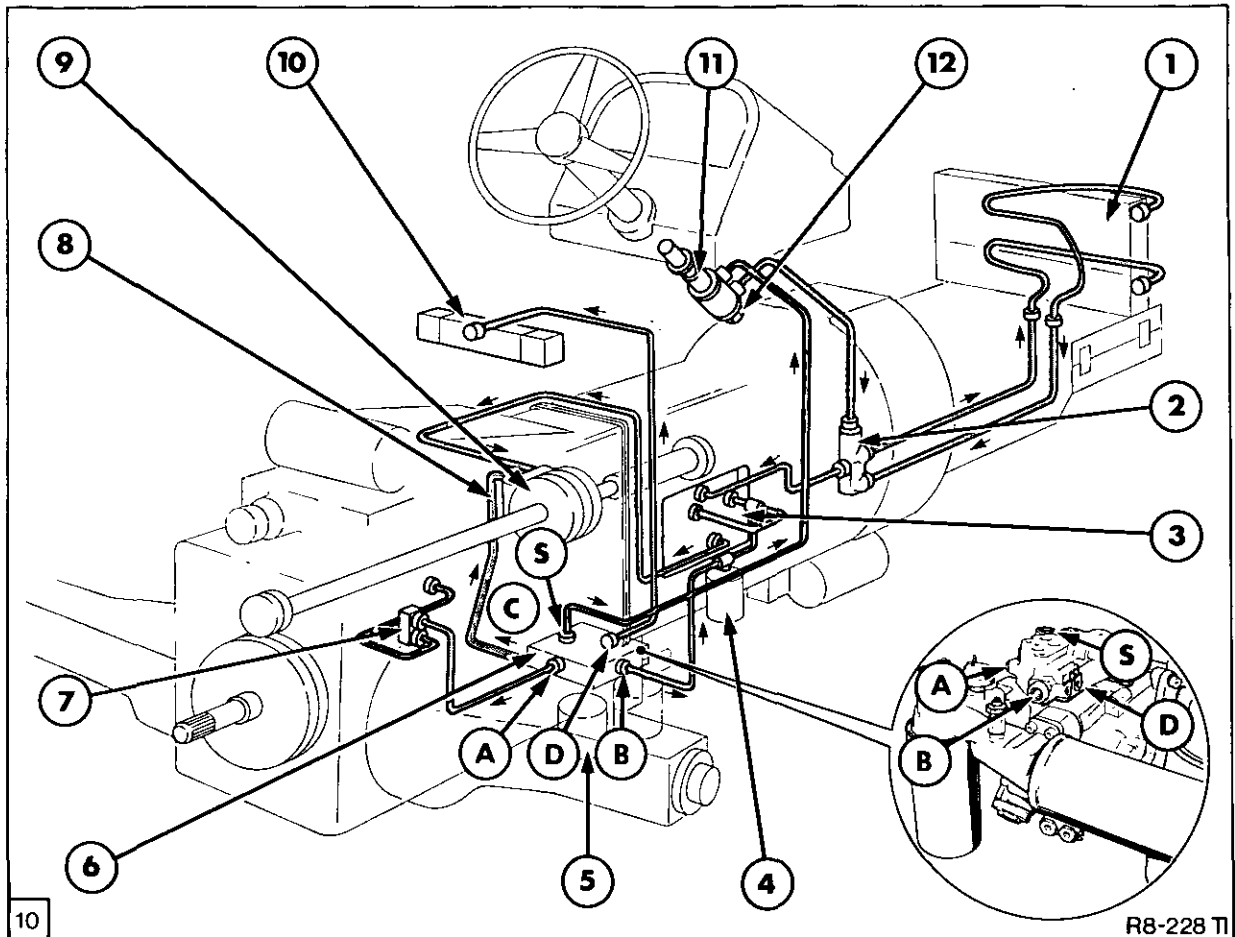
, illustrates the flow of oil from the hydraulic pumps to the low pressure, steering
